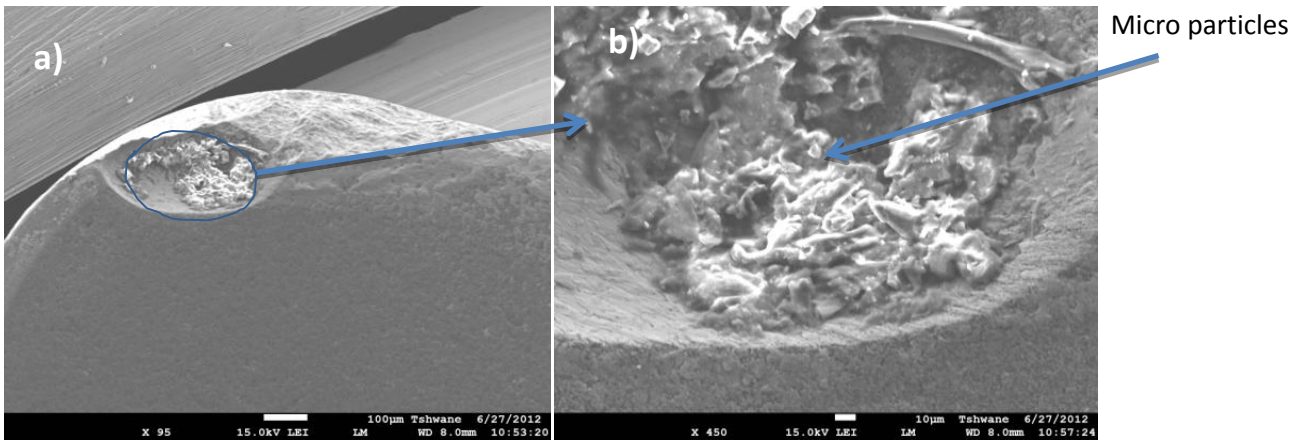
Crater face of failed CBN-100 cutting insert (Speed 600 m/min, a_p 0.1 mm, feed 0.1 mm/rev)
